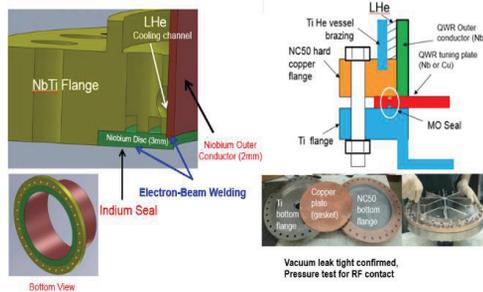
Redesigned bottom flange (left) with indium seal, and metal gasket bottom flange utilizing NC50 under development (right).
